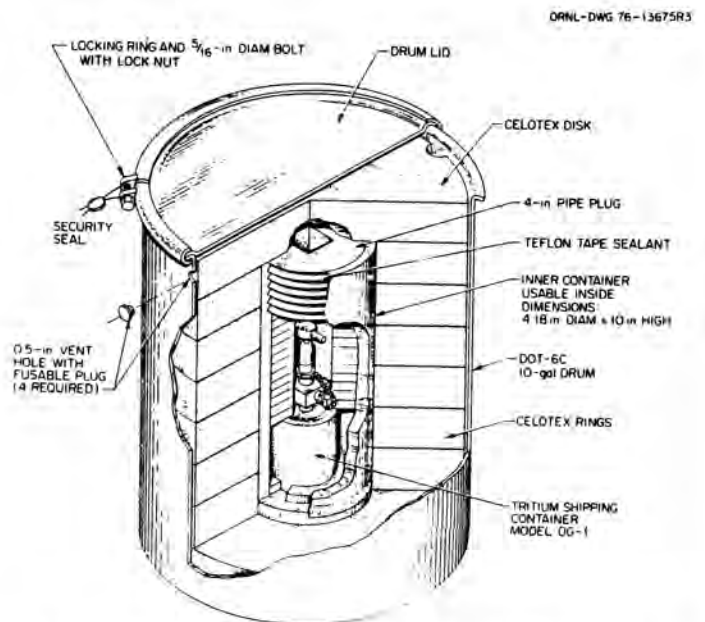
Typical assembly detail, 10-gal size DOT-6M tritium trap package, Type B.
